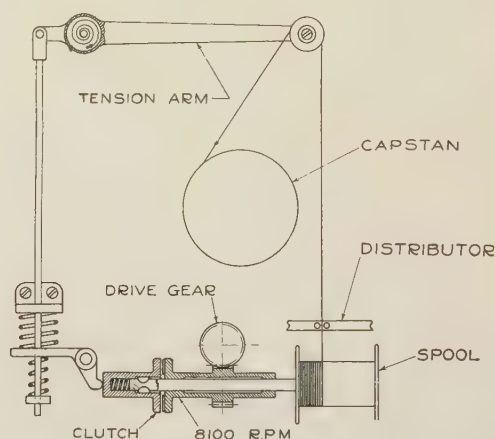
AUTOMATIC TENSION MECHANISM OF NO. 3 WIRE-DRAWING MACHINE
